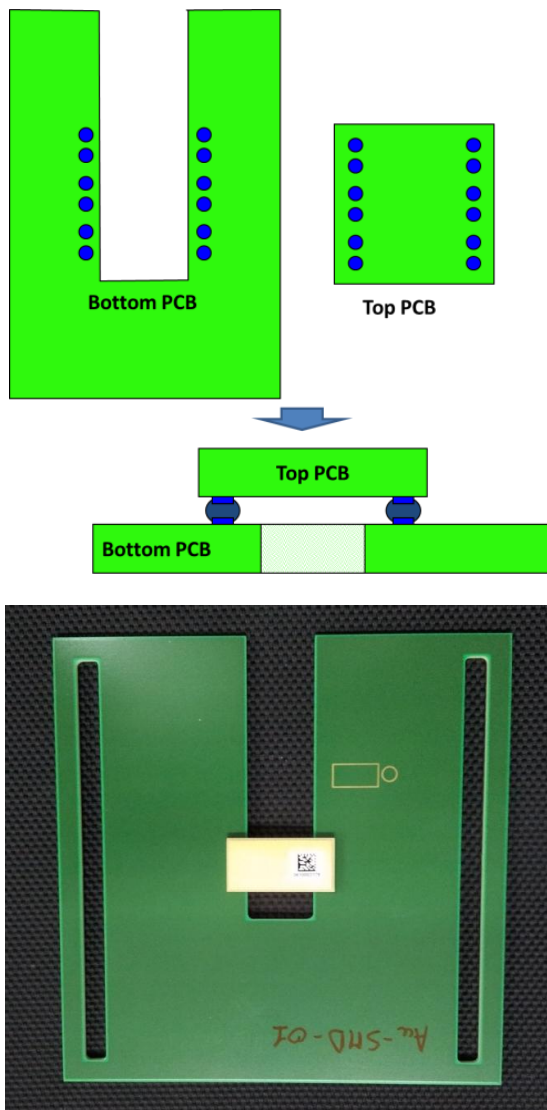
Schematic drawing (top) and realisation (bottom) of the concept of assembling two boards together with a slot in the bottom PCB allowing the Charpy hammer to impact the small PCB.
